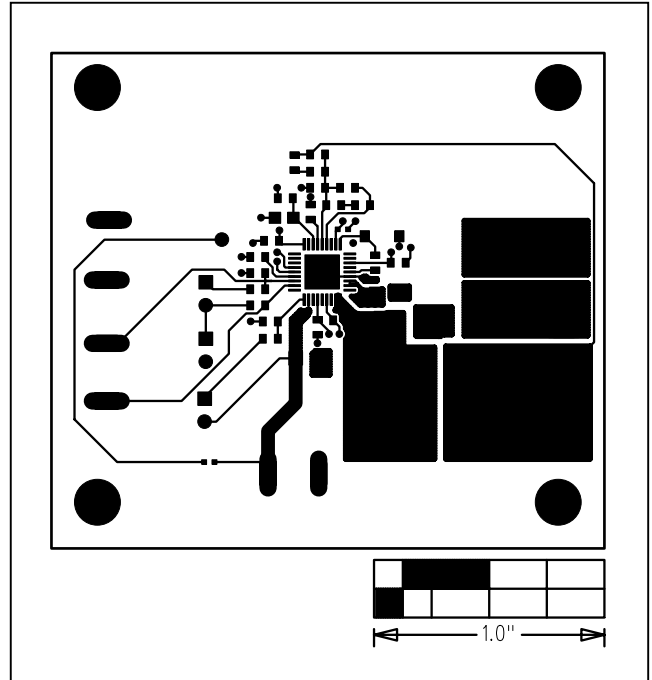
MAX15015A EV Kit PCB Layout—Component Side
